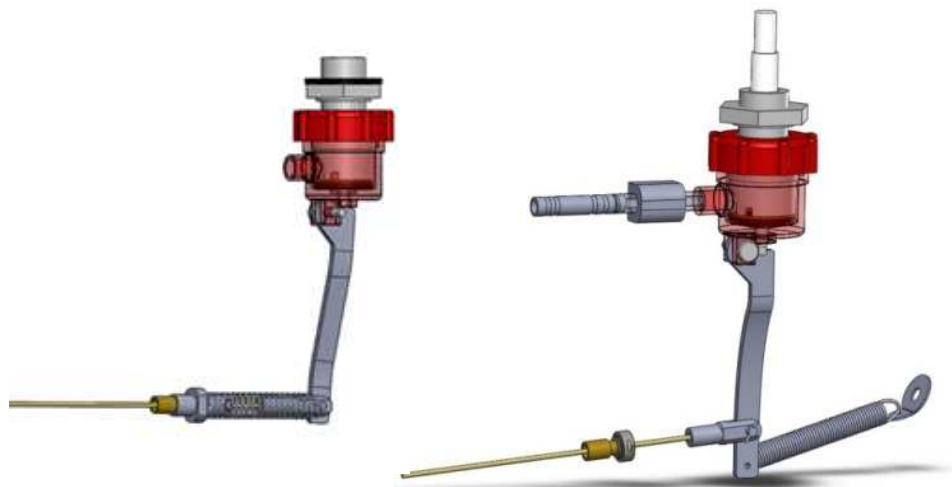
a) Tail valve V2 with compression spring and without the filter; b) Tail valve V2 with the tension spring and filter
